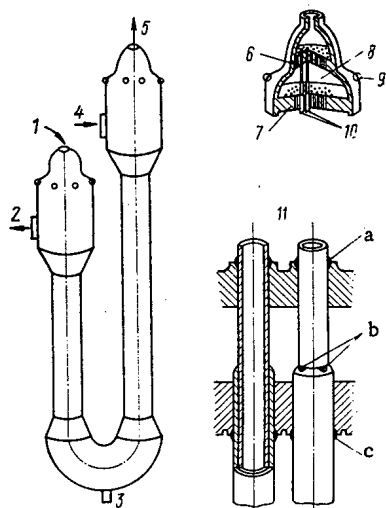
Steam generator with U-shaped two-layered pipes and multiple forced circulation manufactured by Westinghouse: 1) water inlet; 2) sodium outlet; 3) drainage; 4) sodium inlet 5) steam outlet; 6) pipe mounting panel from the water side; 7) pipe panel from the sodium side; 8) helium (stagnant) 9) inspection window; 10) double pipes (≈ 24 m); 11) overall view of the connections between the double pipes and the pipe panels a) top weld; b) longitudinal grooves for leakage detection; c) bottom weld).
